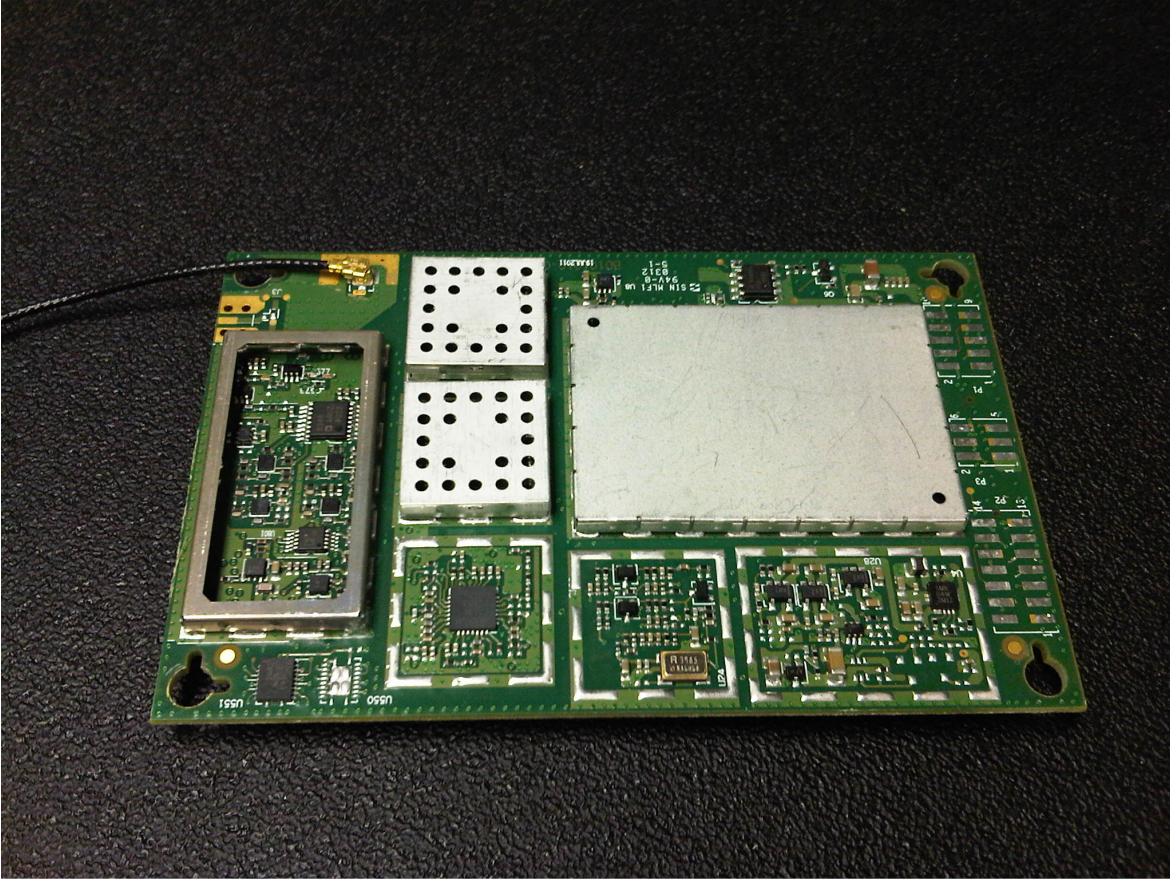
IDP-180 Electronics (both circuit cards) – Bottom View
